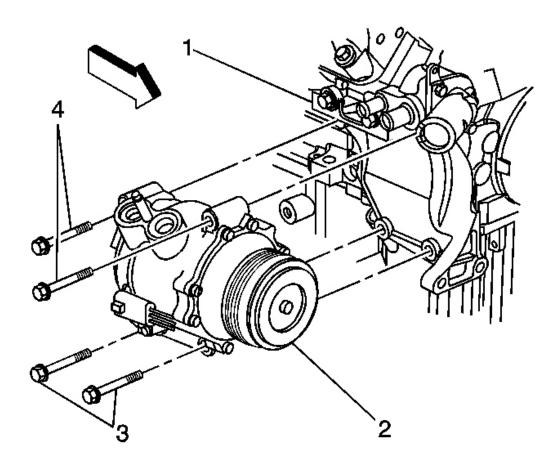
View Of A/C Compressor Bracket Bolts Courtesy of GENERAL MOTORS CORP.
